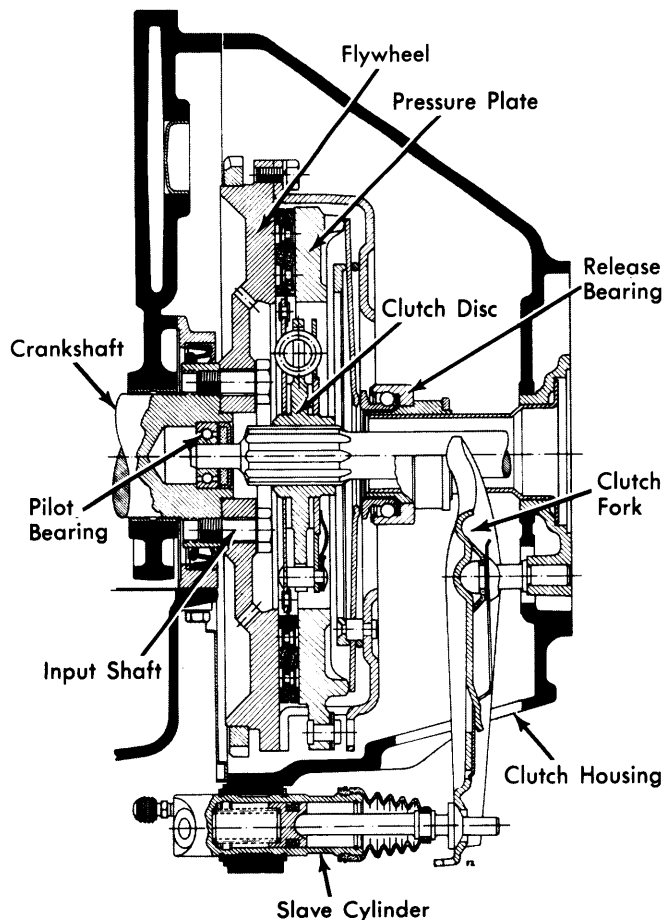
Sectional View of Clutch Assembly (3.0 Shown)
